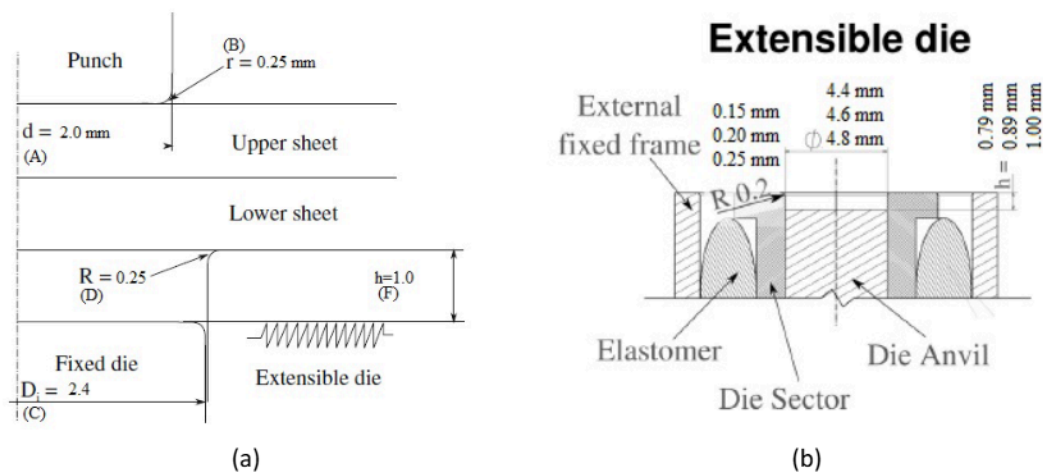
(a) The clinching parameters using extensible die type (b) Schematic drawing of the extensible die
